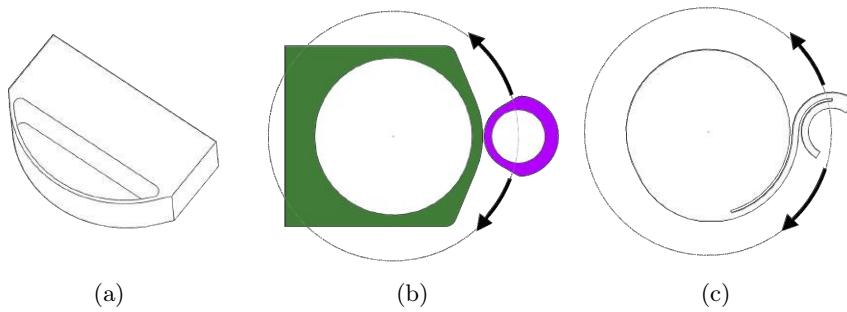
(a) Isometric view of a leaf spring. (b) Simplified cross-section of the rolling surfaces that hold the dribbler roller. Circular sections allow relative rolling motion moving the mobile purple section to follow a circular path. Flat sections limit the angle the bearing can rotate through. (c) Simplified cross-section through the center of the dribbler system. A compliant band joins the motor and roller and provides the restoring force to the roller.
